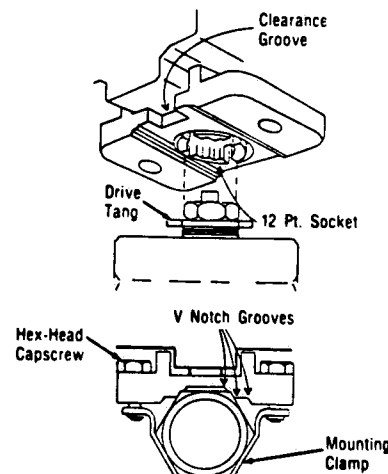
PNEUMATIC ACTUATOR REASSEMBLY.
